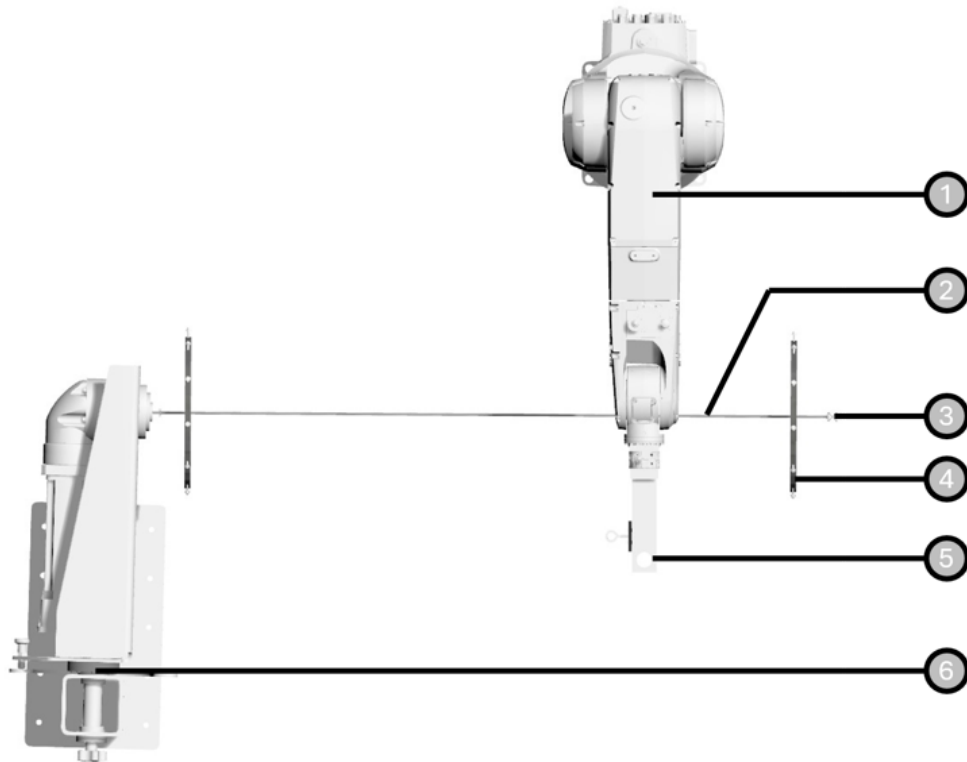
New manufacturing process set-up: (1) ABB IRB 1200-5/0.9 robot (2) Threaded rod (3) Support of threaded rod with bearing nut (4) New aluminium end plate with winding pins (5) New robot end-effector (6) Rotation external axis (turntable).
